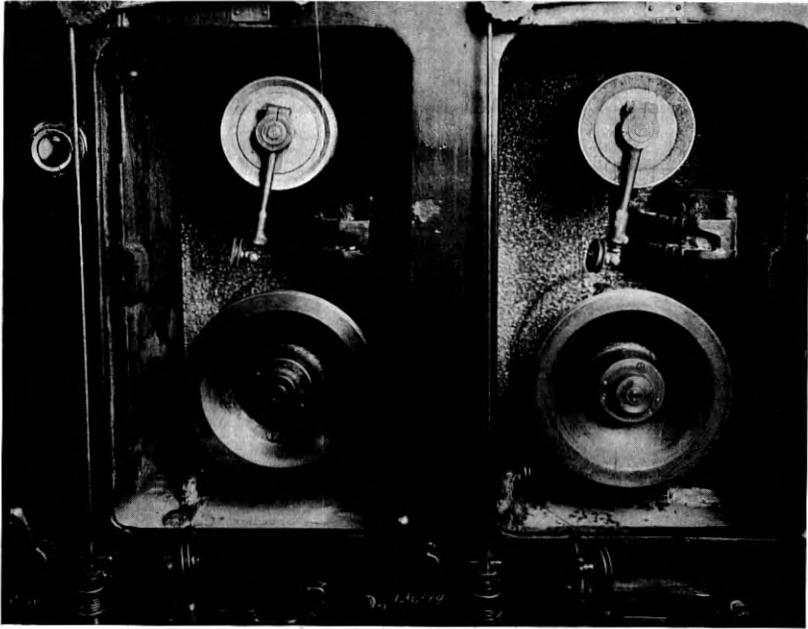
Close-up view of units of No. 3 wire drawing machine
